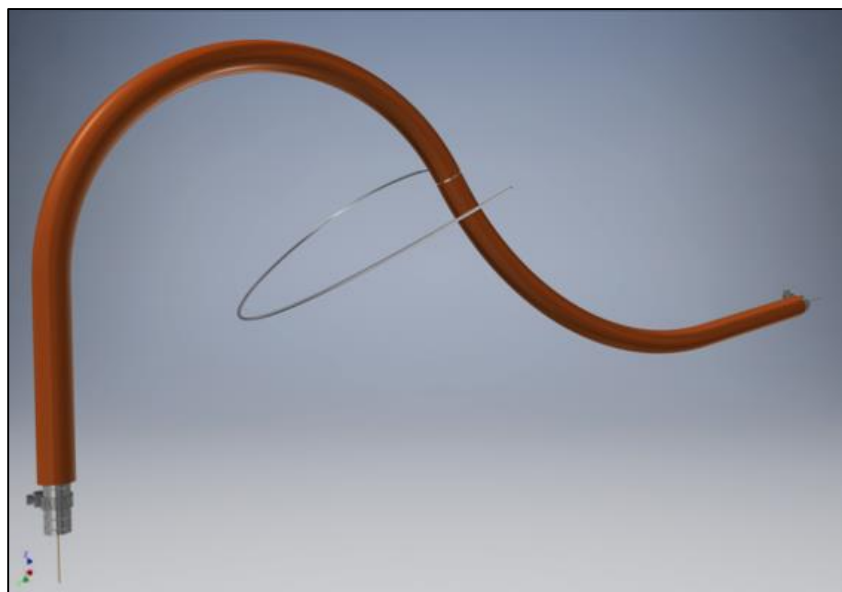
GC-ICP-TOF-MS Front View (Version 1)
